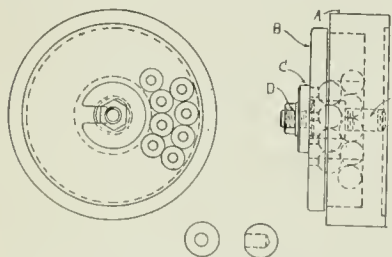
JIG FOR DRILLING HOLES IN BALLS AND SHOWING BALL AS DRILLED.
